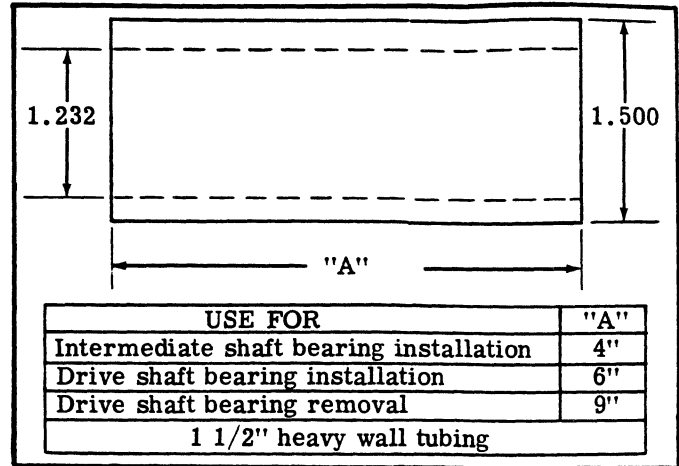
Special Shaft Bearing Removal and Installation Tools.
